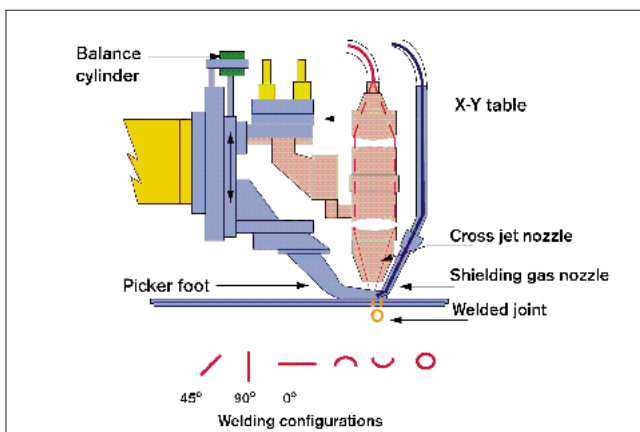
Concept of the "Laser Picker" welding head.
